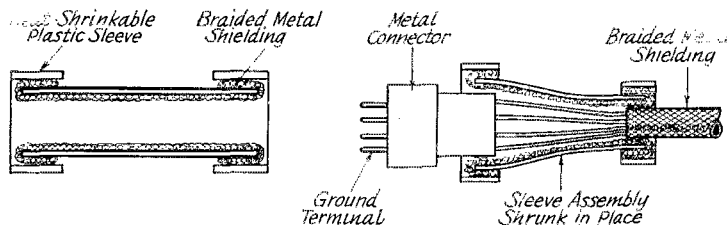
The drawing shows how good r.f. shielding can be obtained from connector to cable.
